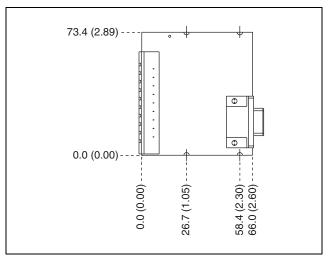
NI 9211E Dimensions in Millimeters (Inches)
